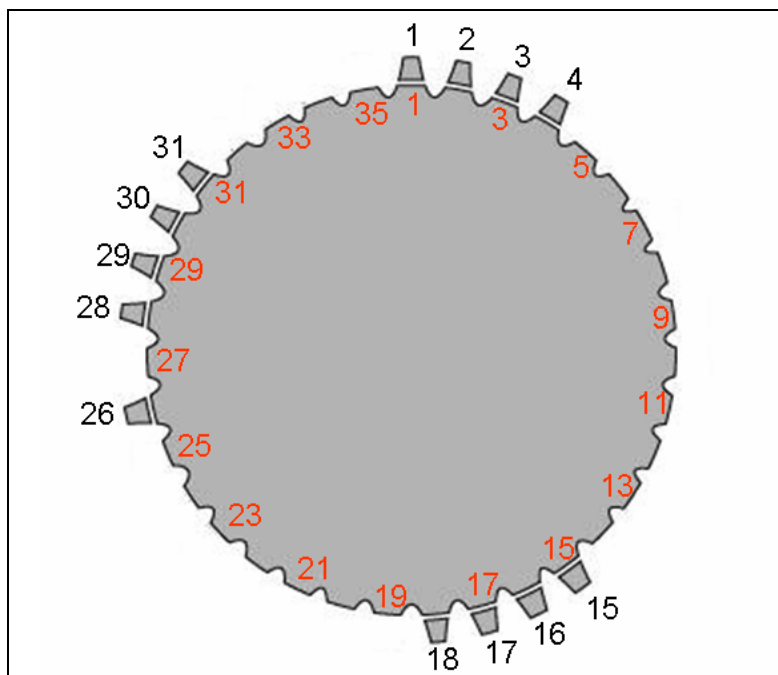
Location of recovered teeth on spare drive gear. (Gear is driven counterclockwise.)
